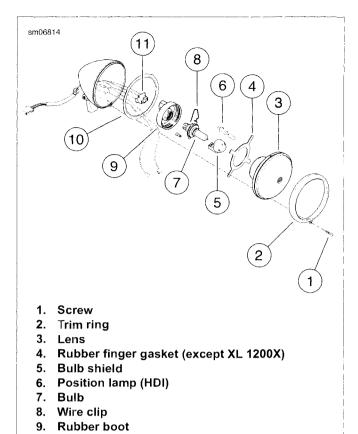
Headlamp Assembly: XL 883C, XL 1200C/X
